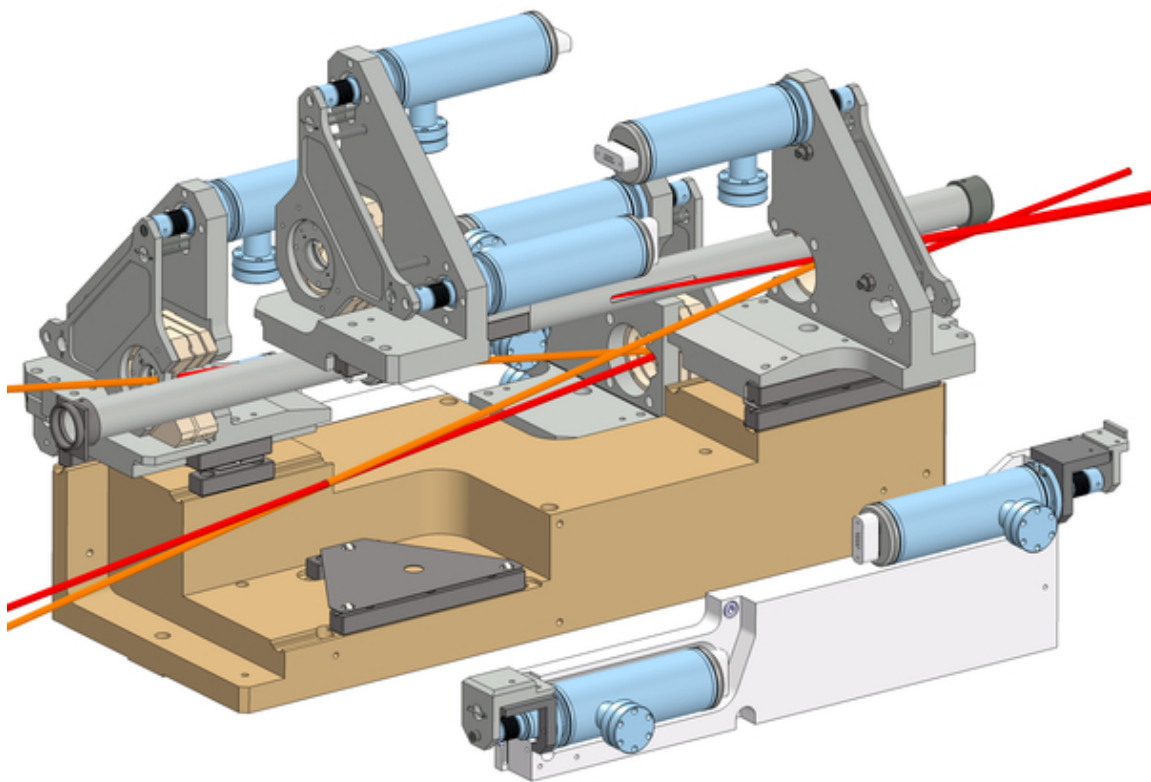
Exploded view of the four mirror mounts system. The invar plate with two encapsulated motors and one of the flat mirror mount system have been unlinked from the heavy stainless steel base for the drawing.
